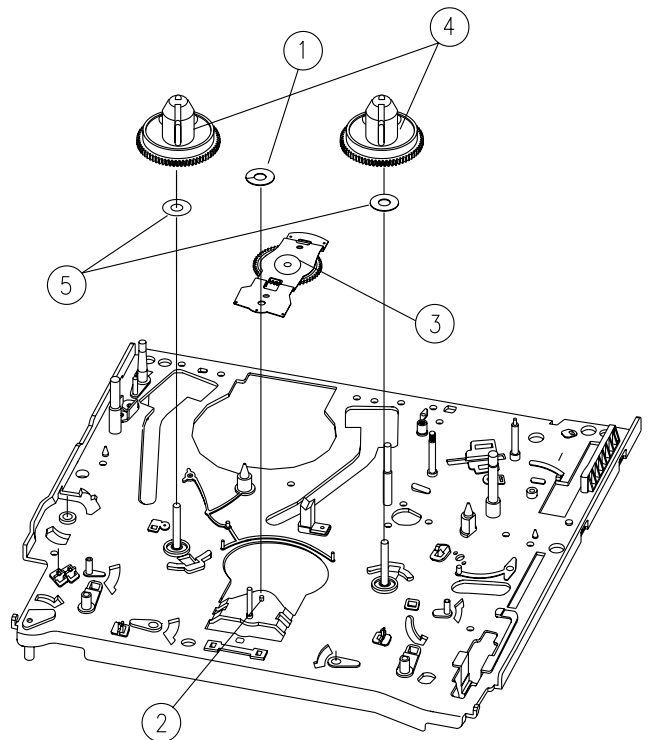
IDLER PLATE TOTAL ASS'Y &
